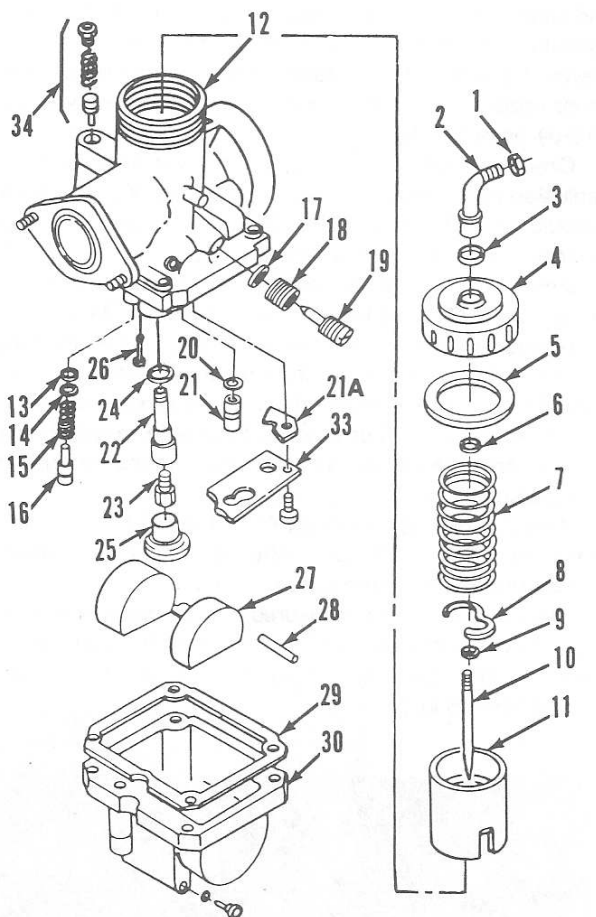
Exploded view of typical Mikuni carburetor used on YTM200 and YTM225 models. Inlet valve retainer (21A) is used on models with an unthreaded inlet valve (21). Idle mixture screw (16) is located in side of body on 200 cc chain drive models (see Fig. Y6-6).
